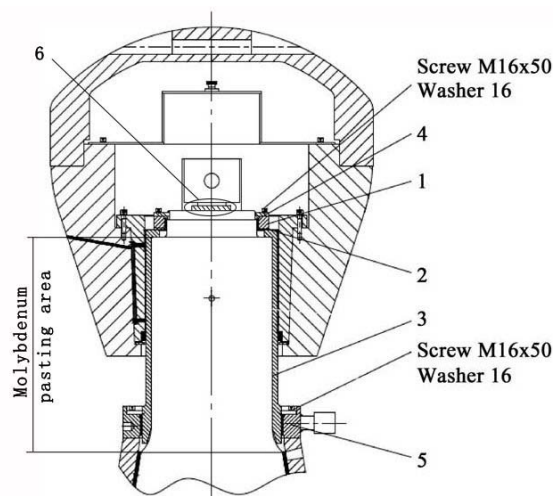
Installation scheme of main shaft sleeve of PXZ-1500II Type
